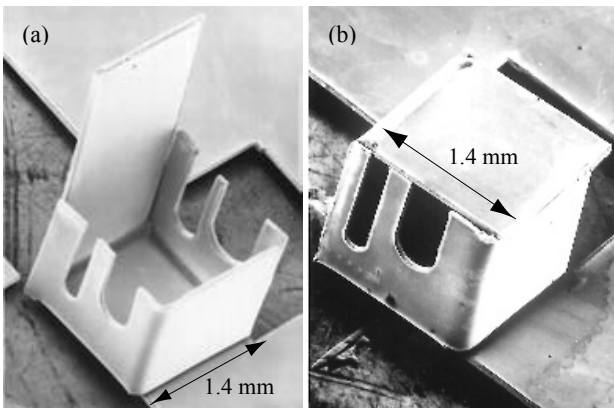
SEM photographs of fabricated micro-gearboxes. (a) Before and (b) after covering.
